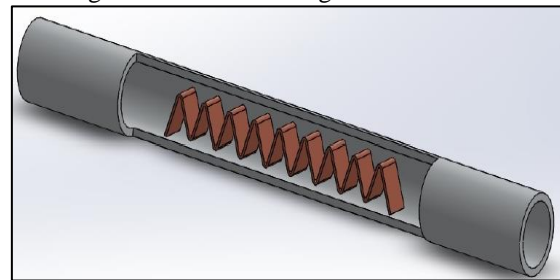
Inner Tube with Twisted Tape Cut Section View
